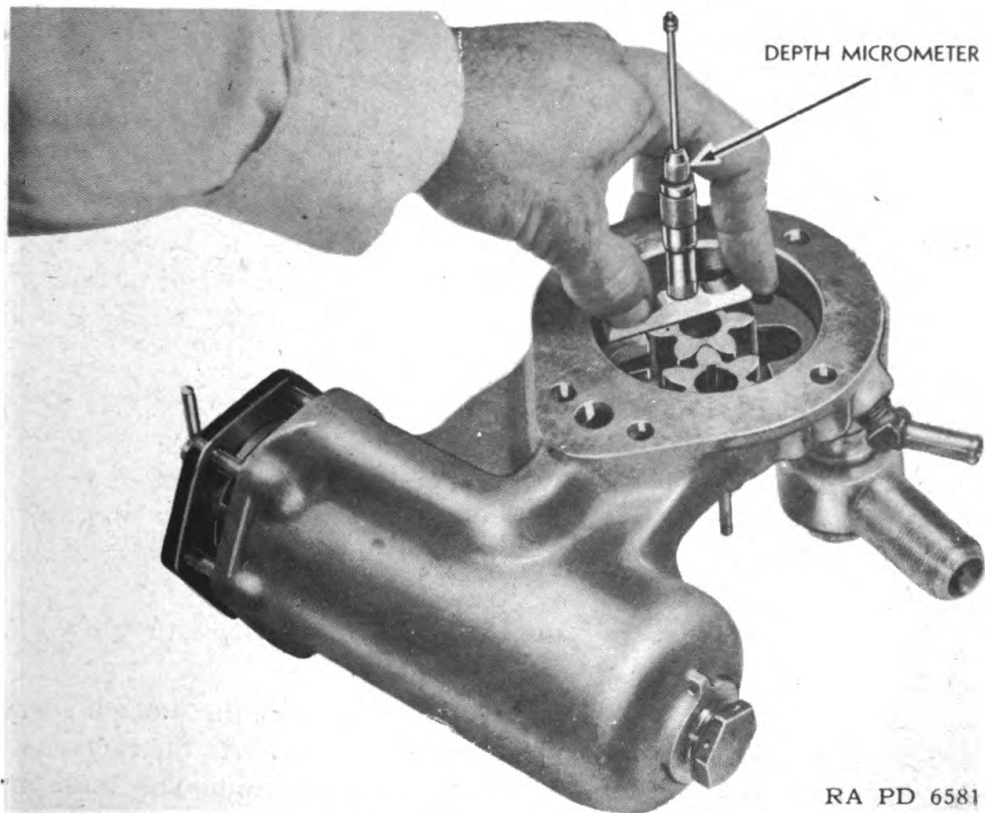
Checking oil pump gear side play with depth micrometer.
